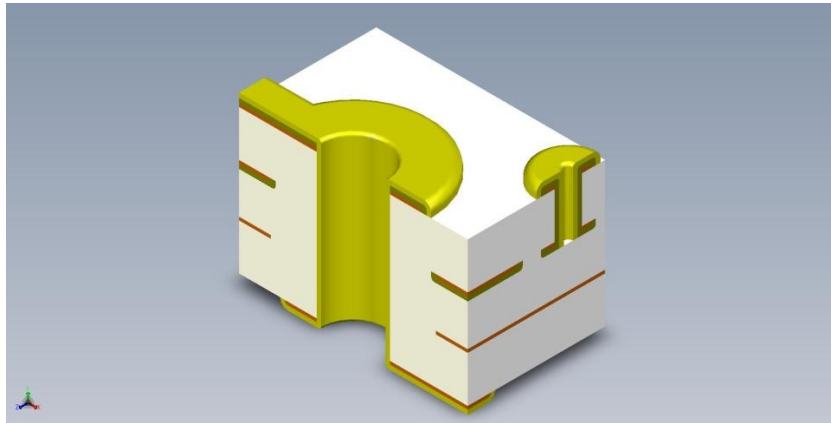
Four layer assembly through-hole plated and all exposed areas get copper added
